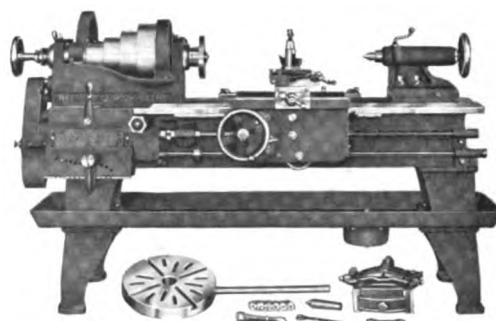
14-Inch Reed-Prentice Cone Driven Lathe
